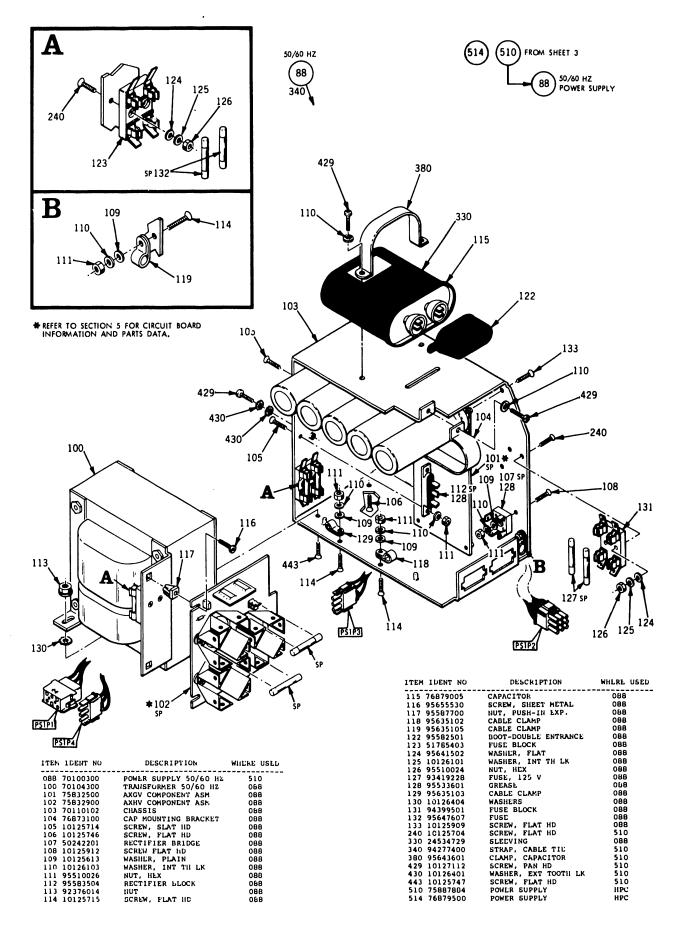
POWER SUPPLY ASSEMBLY (1 OF 2)
